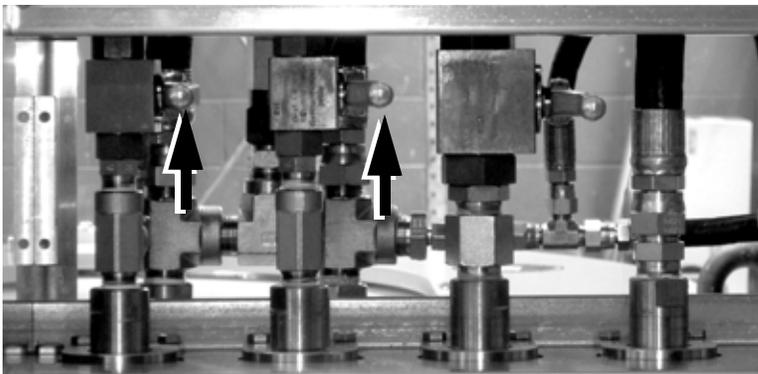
When the clamping drive is fully engaged (clamping pressure equals system pressure), return both clamping levers to the up position.
